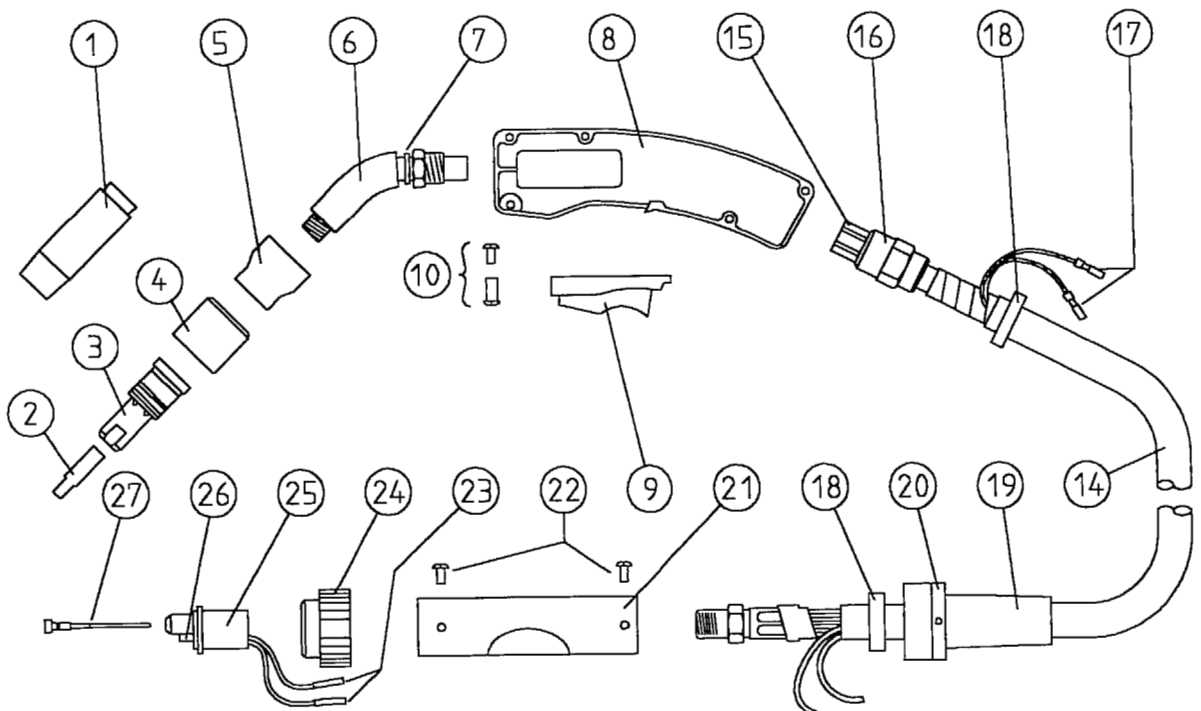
BEXT2-4E210AE GUN & CABLE ASSEMBLY
